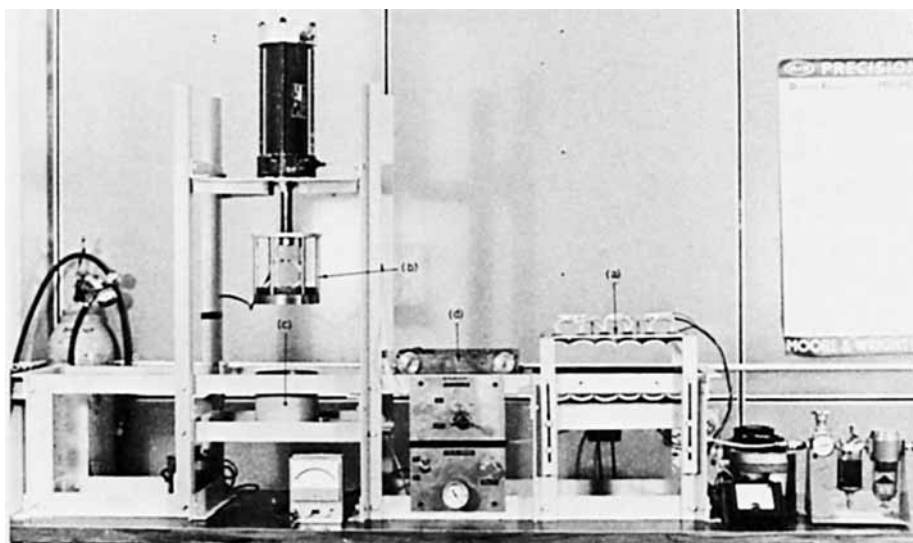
The thermoforming apparatus: (a) heater; (b) clamping plate; (c) steel box into which compressed air is fed; (d) trolley.
